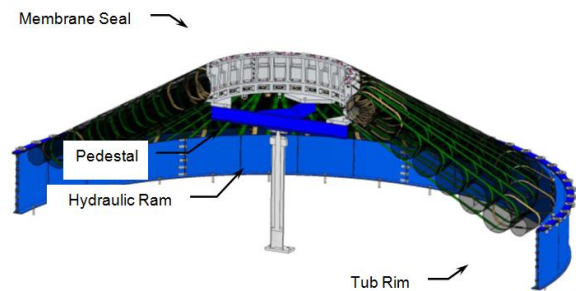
Cutaway view of the 6m HIAD static load test fixture
